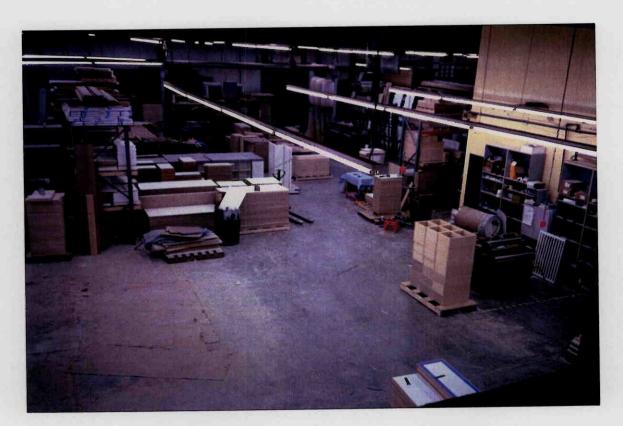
Interior of Conrad Corporation, 238 Bodwell Street
